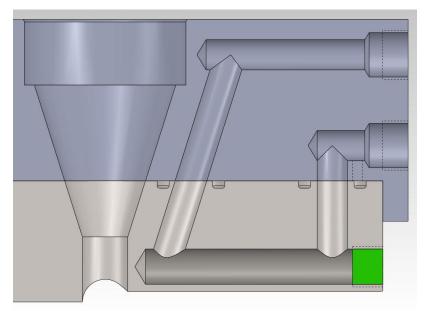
The picture shows the matching cooling holes for Shoulder and Shoulder Holder. The green part on the Shoulder is the M8 conical plug. On the top of the Shoulder the interface for the O-rings can be seen
